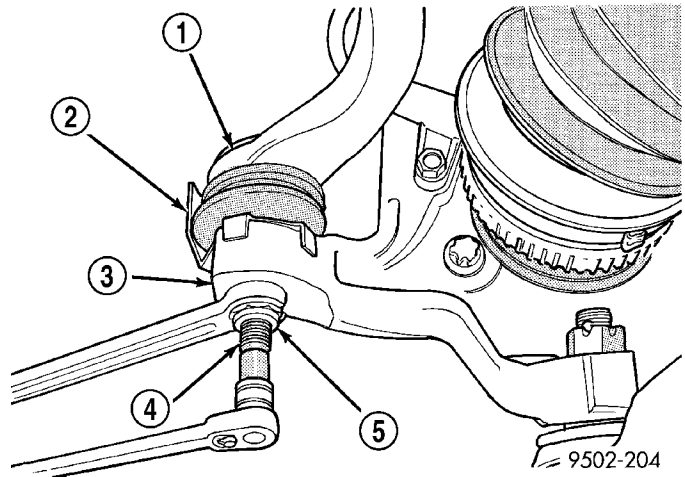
Removing Tie Rod End-to-Knuckle Nut
